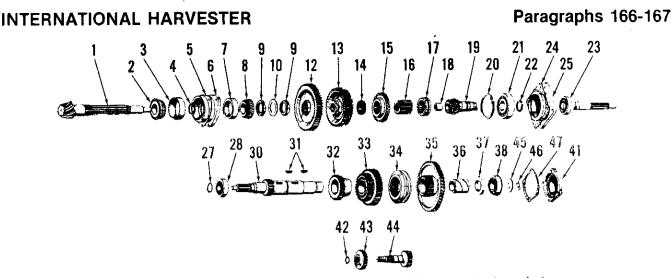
Exploded view of the transmission shafts, gears and component parts used when tractor is equipped with transmission driven pto (single plate clutch). Note the solid countershaft (30), Refer also to Fig. 108.
